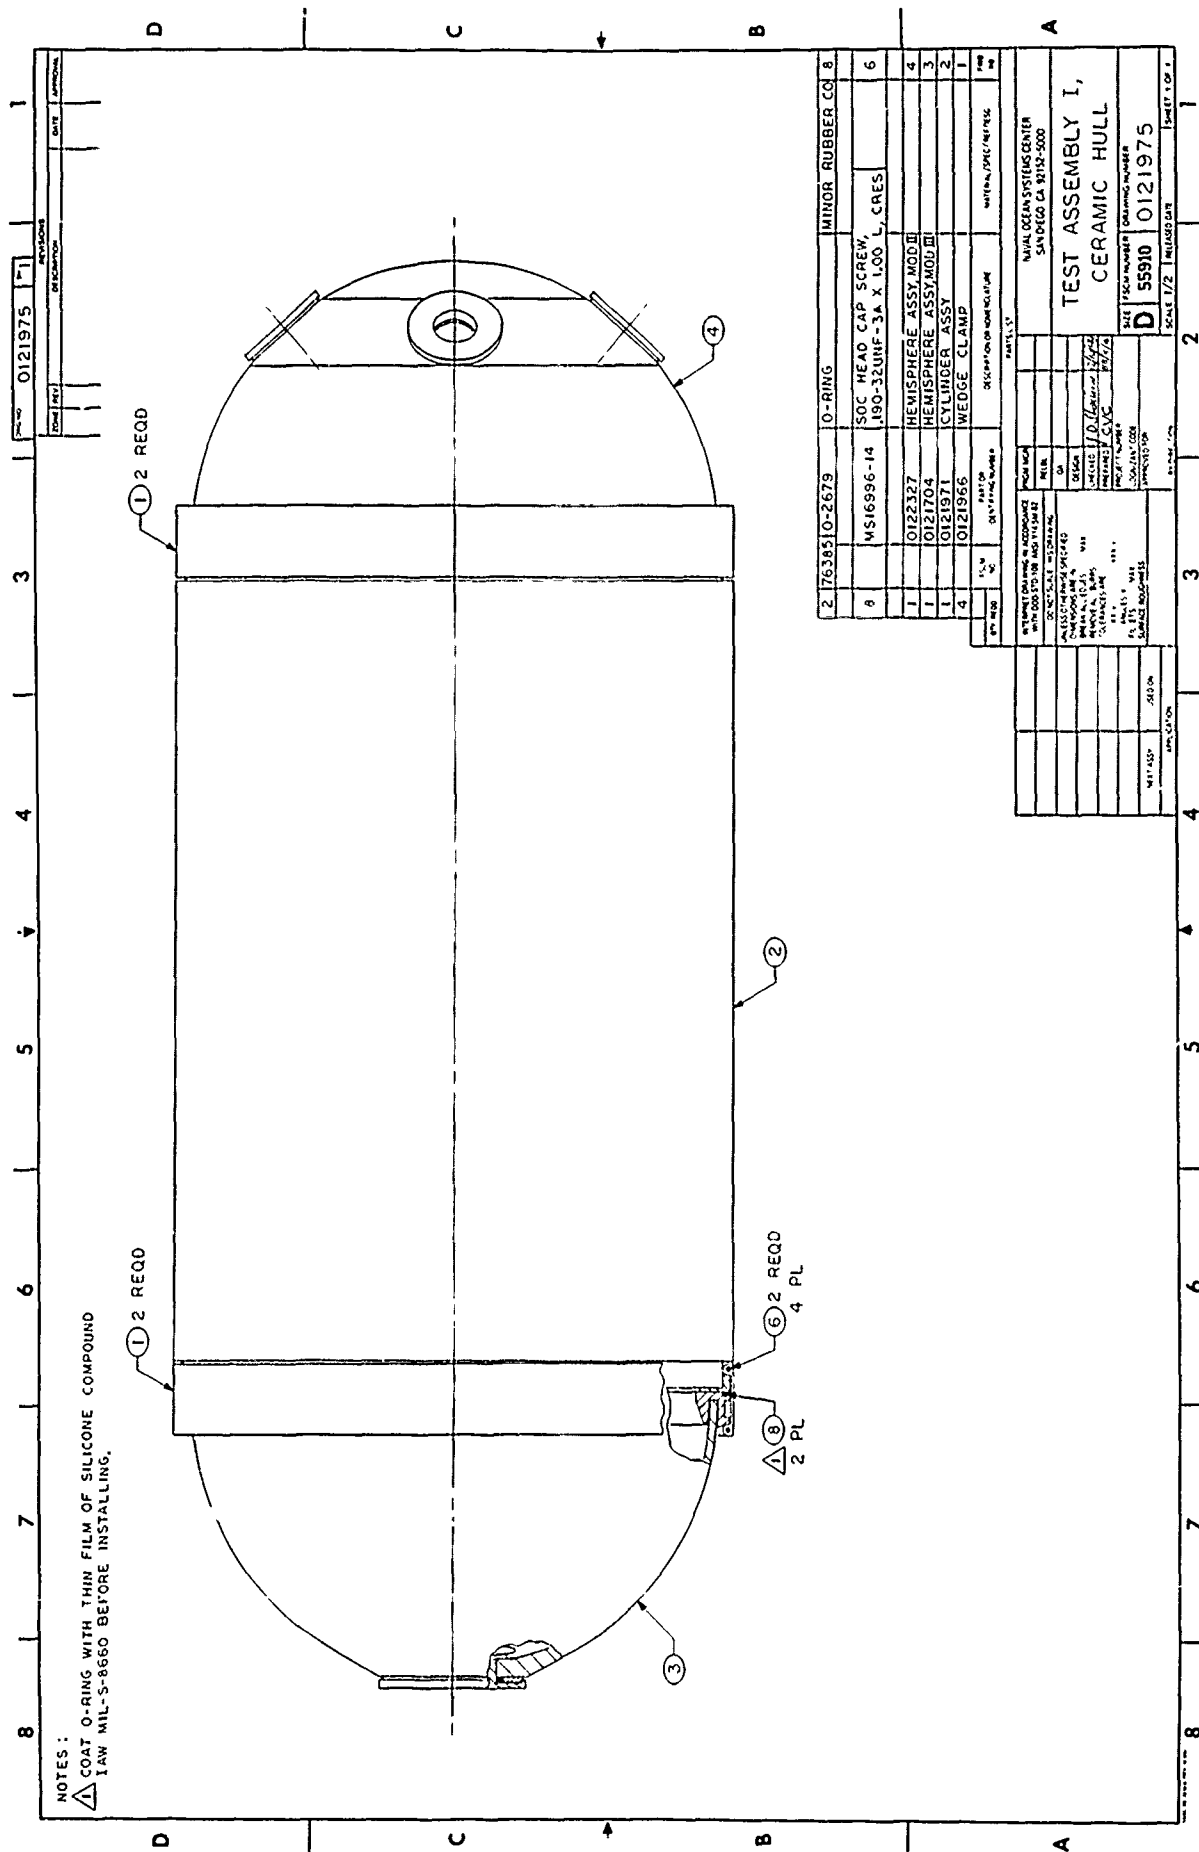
List of components comprising the short (Mod I) housing test assembly made up of one cylinder and two hemispheres.
